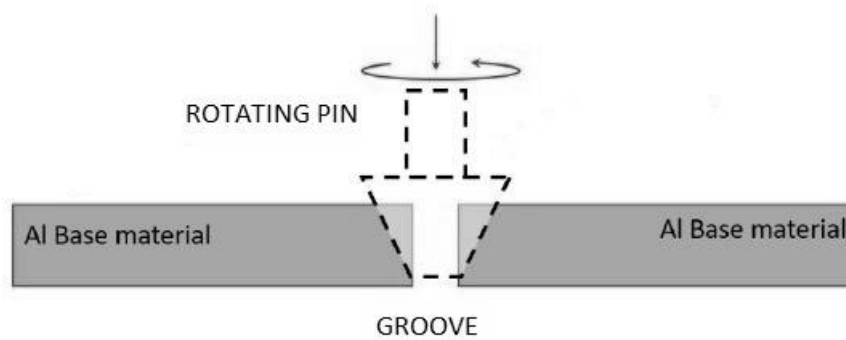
Rotating pin and its location in the groove during HYB butt welding of plates.
